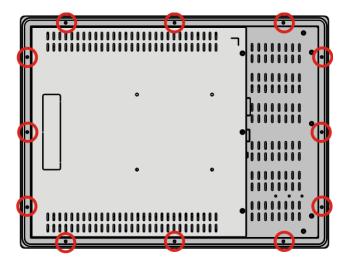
SRM-150 Frame Rear View (12 rackmount kit screw holes)
